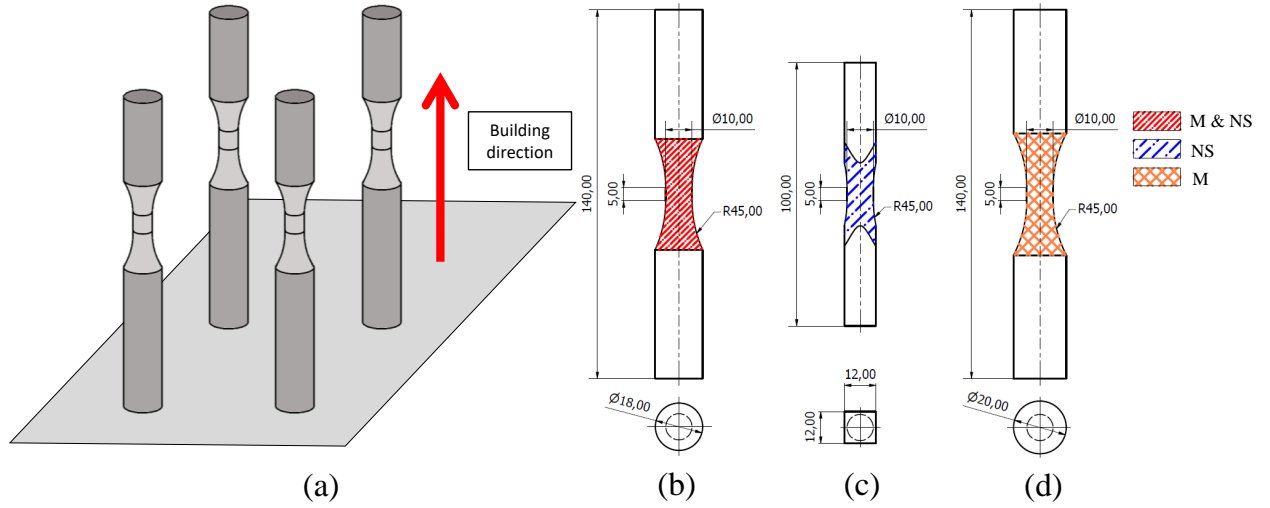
Fabricated specimens of the experimental campaign: a) scheme of the printed specimens respect to the building plate; b) main dimensions of the axial specimens for servo-hydraulic testing machine; c) main dimensions of the torsional specimens for resonant testing machine; d) main dimensions of the torsional specimens for servo-hydraulic testing machine. The dimensions of the specimens were in accordance with the standard BS ISO 1352 [52].
